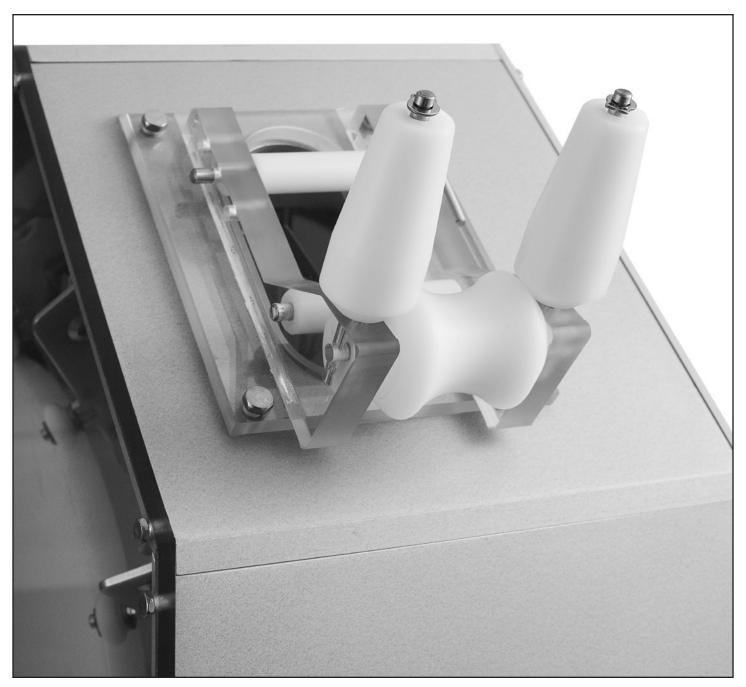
Guide Roll Bracket Sub-Assembly.
